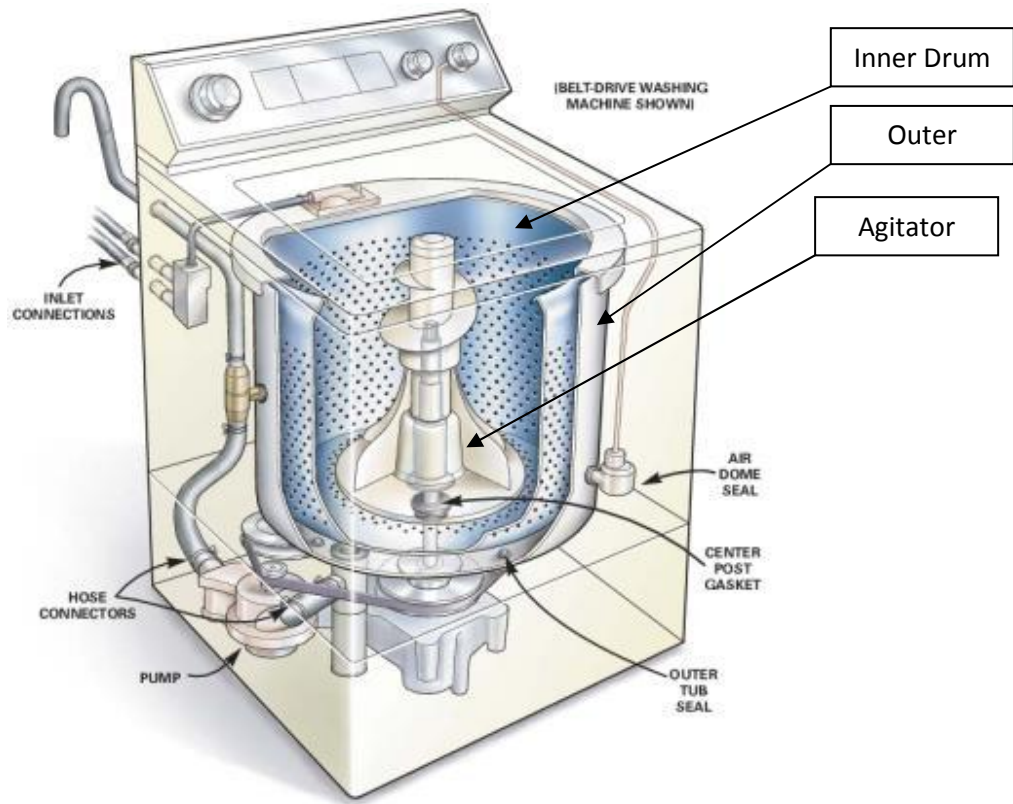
Inside view of a belt driven vertical loading washing machine [26]
